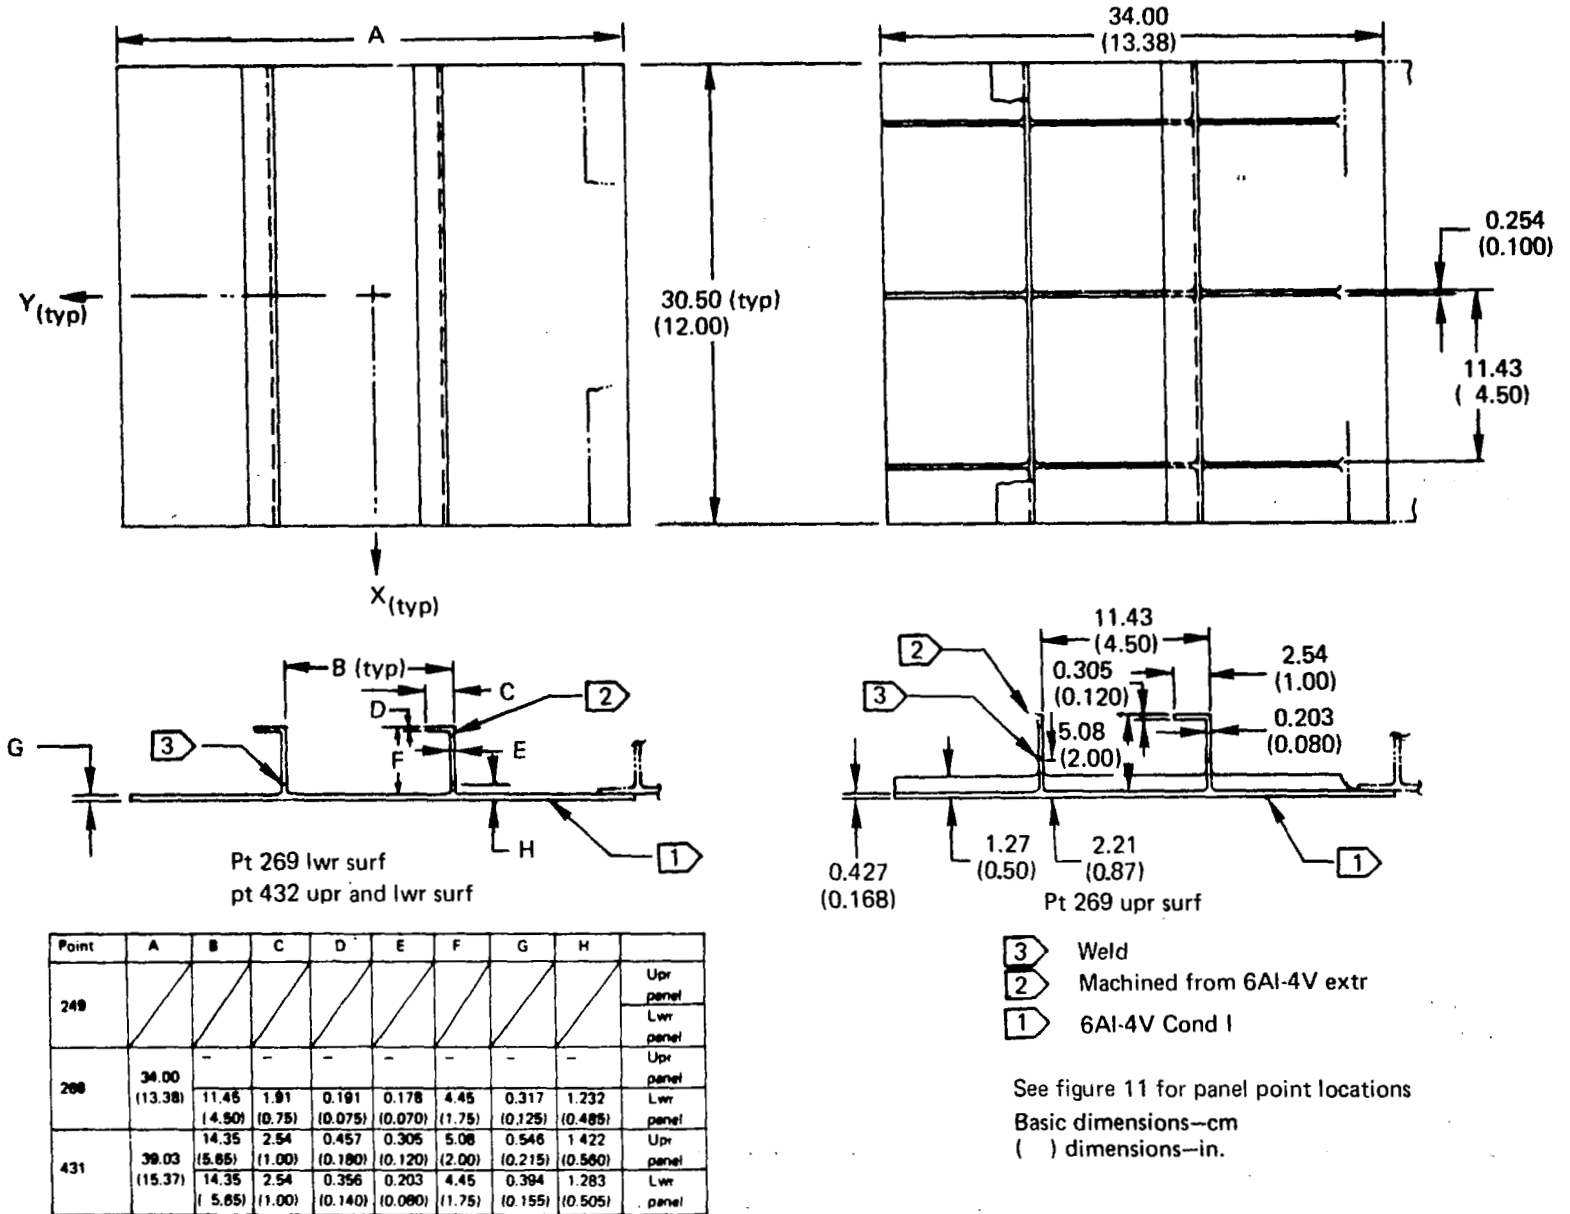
Wing skin panel, integrally machined and welded — sheet stiffener
